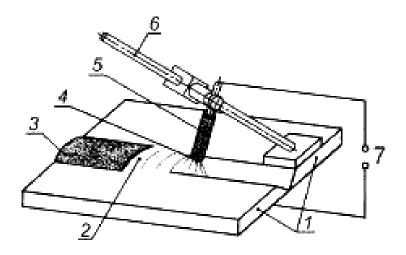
Gravity welding with a covered electrode 1-workpiece; 2-weld; 3-slag; 4-arc; 5-coated electrode; 6-guide; 7-power supply
